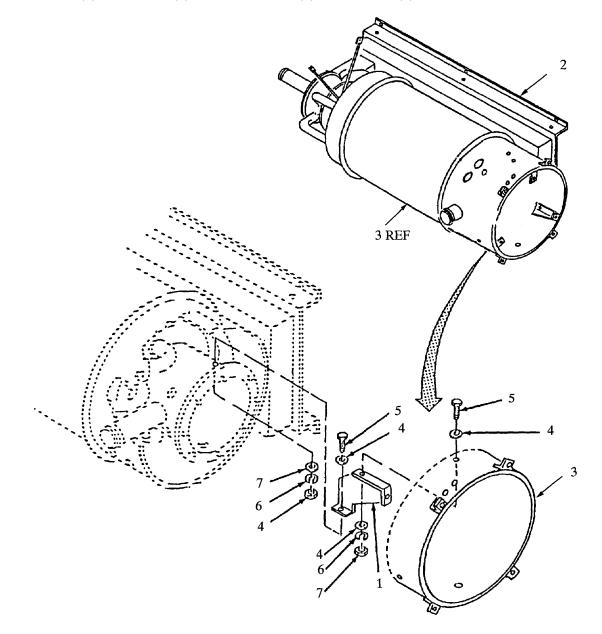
Heat Exchanger, (Model H120-1) Assembly
